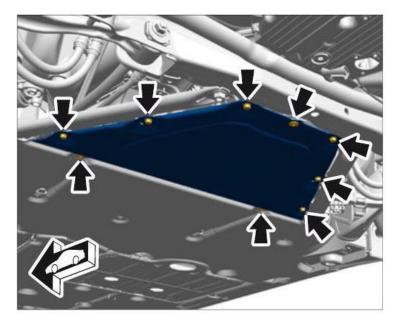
Identifying Rear-Axle Cross Member Braces Courtesy of PORSCHE CARS NORTH AMERICA, INC.
